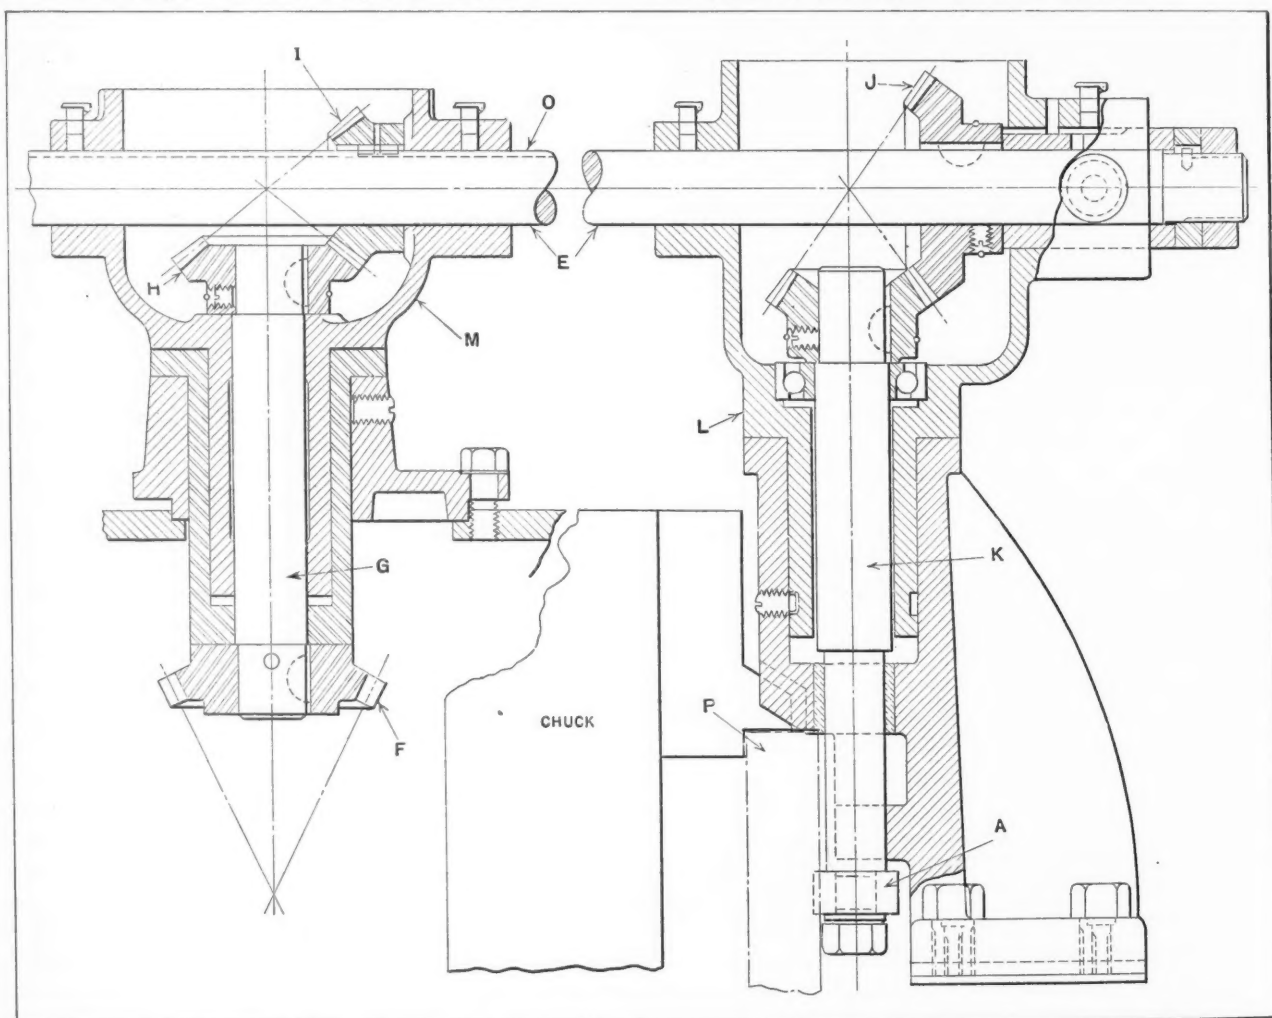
Thread Chasing Attachment Modified to Meet Gear-hobbing Requirements
